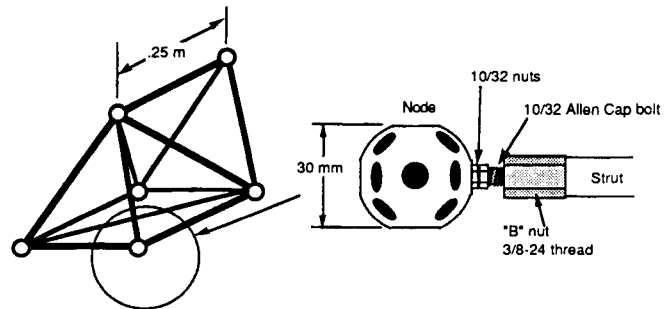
One bay of tetrahedral truss with a closeup of a joint.
